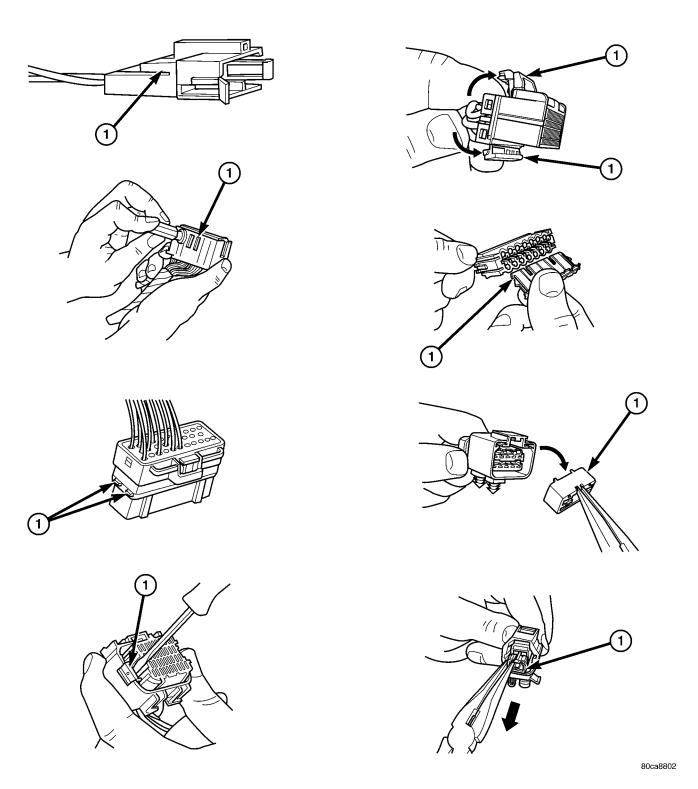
EXAMPLES OF CONNECTOR SECONDARY TERMINAL LOCKS
